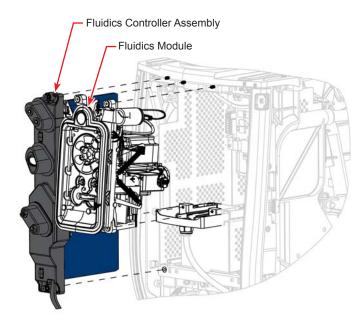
Fluidics Module and Fluidics PCB Assembly Removal
